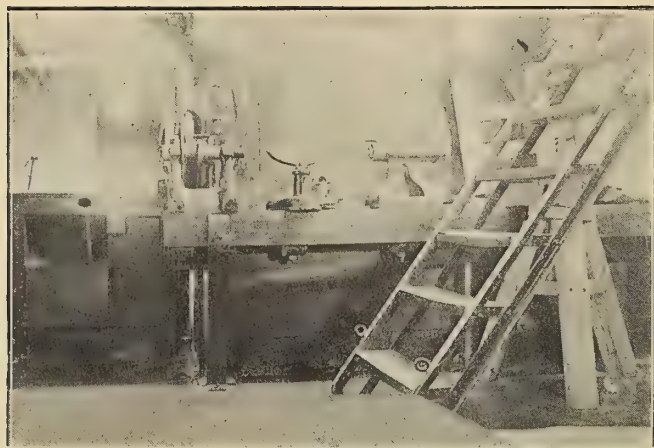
CIRCULAR SAW AND SPEED LATHE
